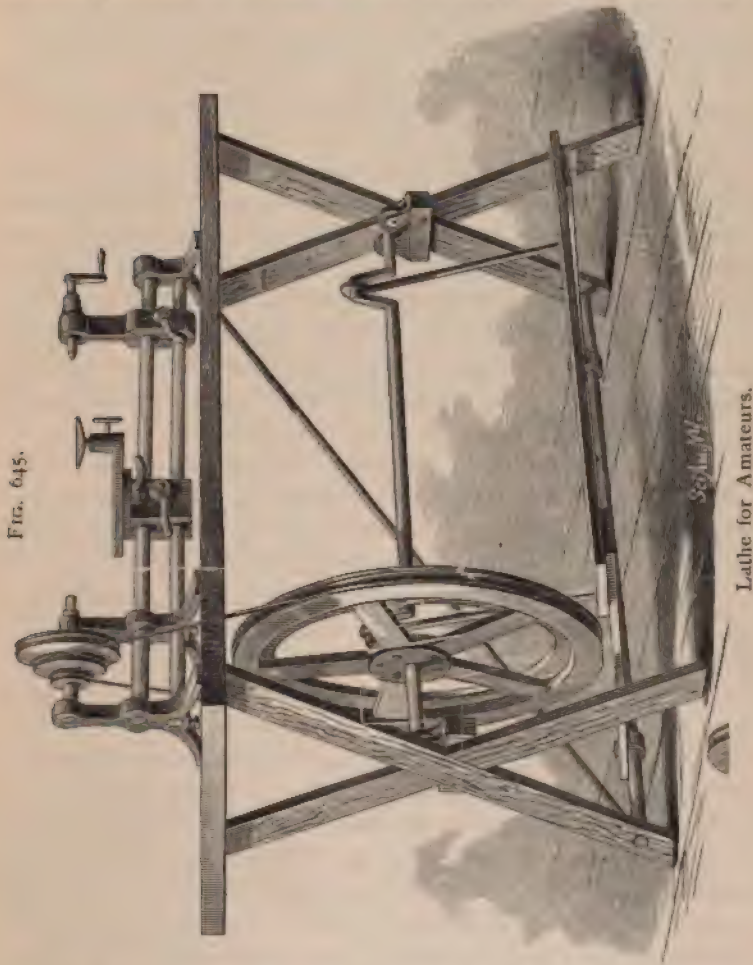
represents in perspective the lathe complete. Fig. 646 is a perspective view of the lathe without the table. Fig. 647 is a vertical longitudinal section of the lathe, showing the manner of securing the head and tail stocks to the bars which form the bed.
